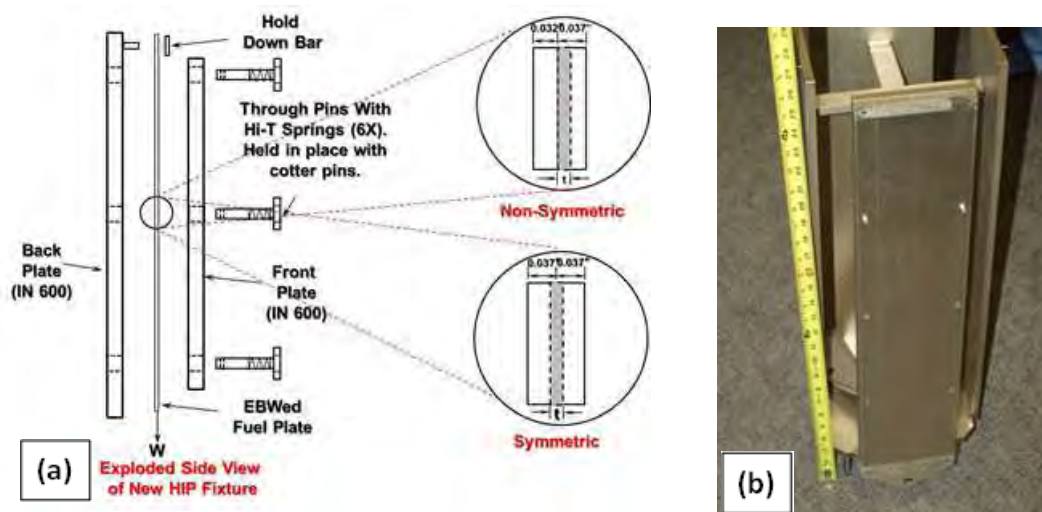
a) One of four sections of the spring loaded HIP fixtures; (b). Photo of spring loaded HIP fixture.
